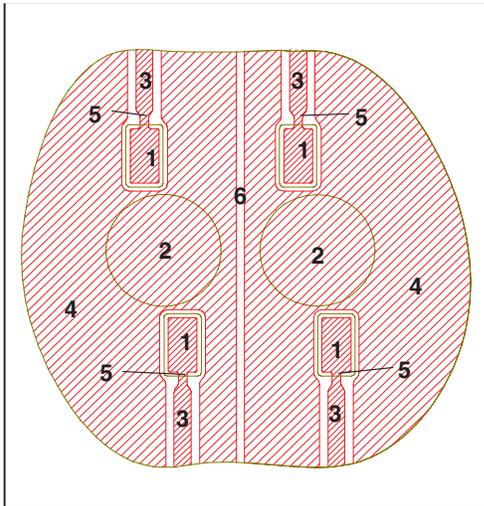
Assuring Electrical Insulation of the Slugs from Neighboring Emitters and Solder Pads.
